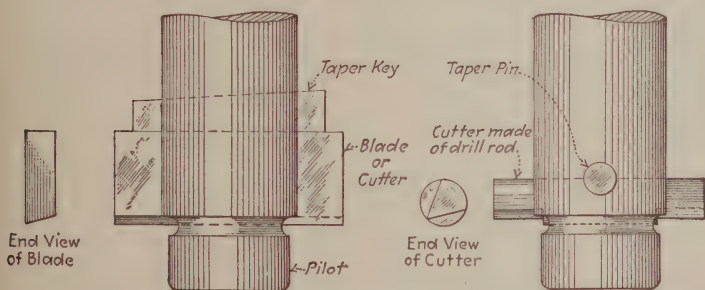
Two types of homemade counterbores with removable blades or cutters.
